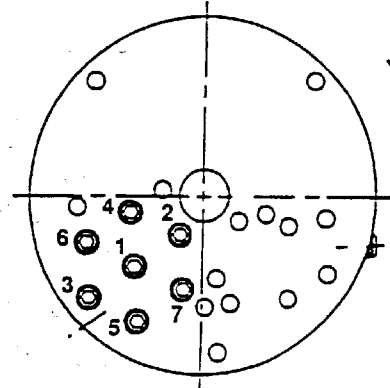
Bolt Tightening Sequence For High Pressure Pump Assembly
